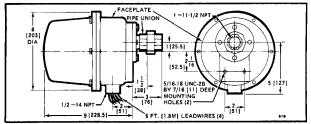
DIMENSIONS OF THE C7012C IN INCHES [MILLIMETRES SHOWN IN BRACKETS].
